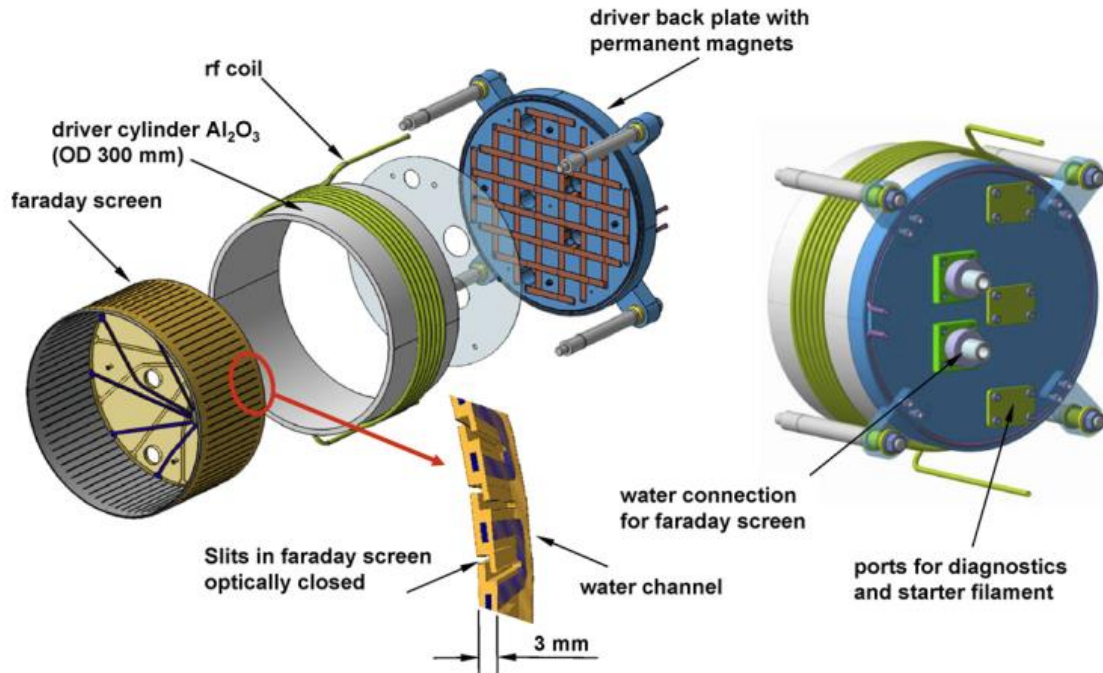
Design of the ELISE driver, right side complete assembly, left side exploded view from inside [32].
